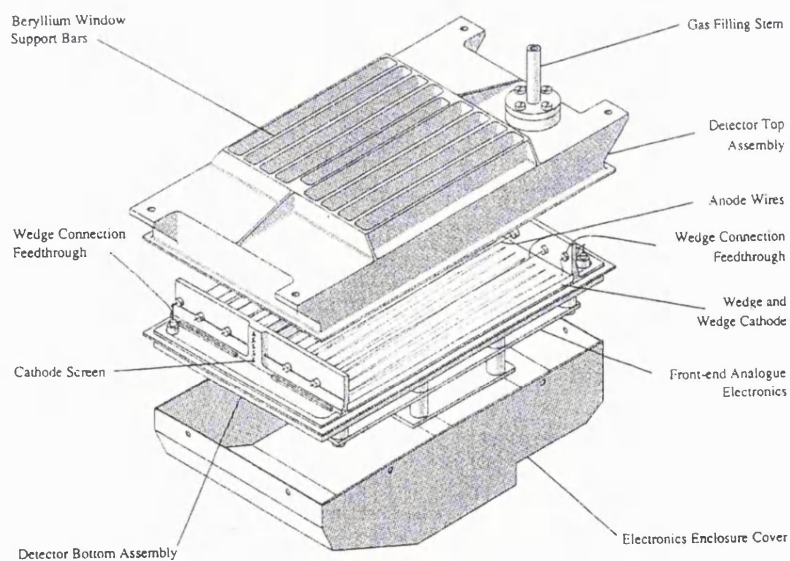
An exploded view of the YOHKOH prototype model detector.
